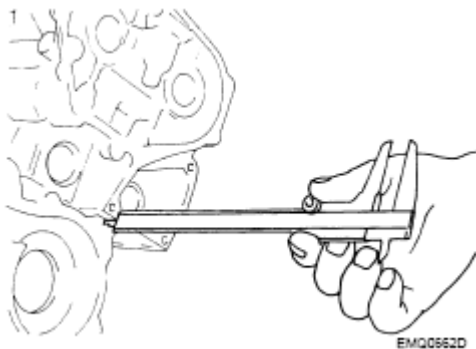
Measuring Distance Between Front End Faces Of Cylinder Block And Cylinder Head
